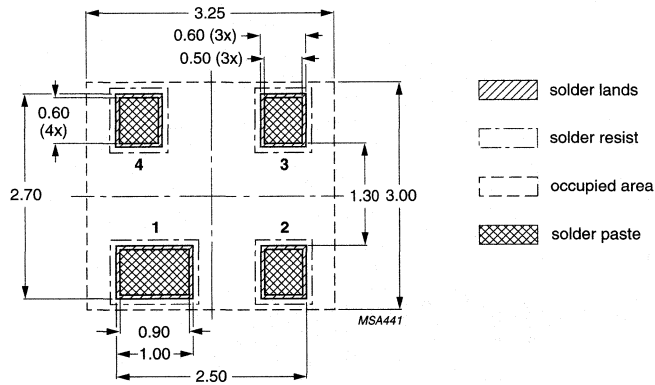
Reflow soldering footprint for SOT143 (footprint for SOT143R is mirror image).
